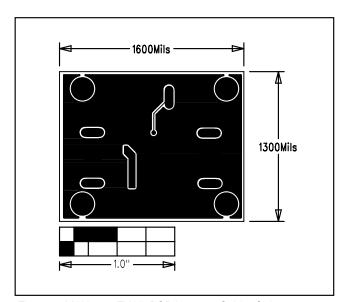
MAX8672 EV Kit PCB Layout—Solder Side
